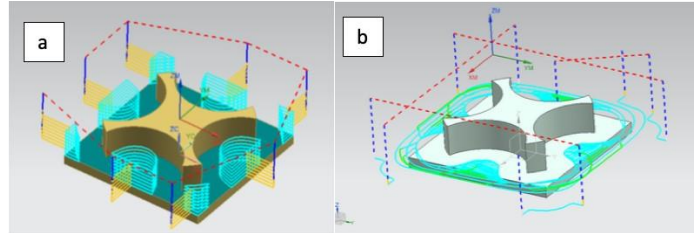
a) Conventional tool path, b) Trochoidal tool path
